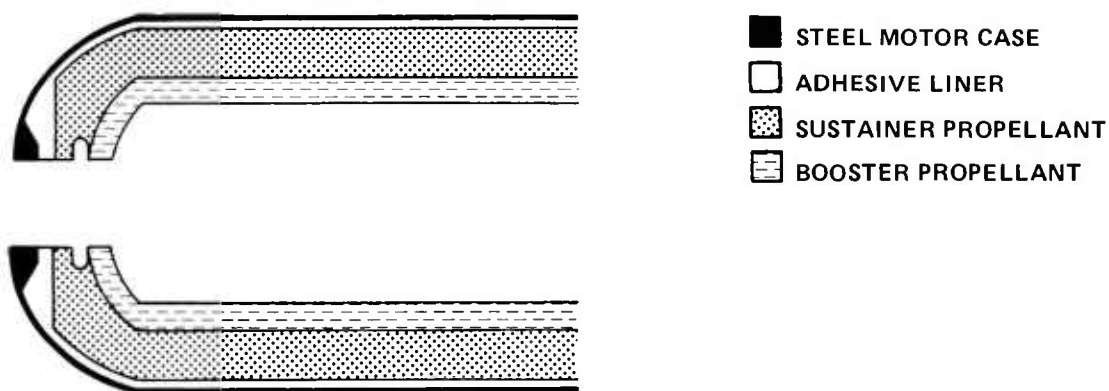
Schematic drawing of the forward end of the Improved HAWK rocket motor.
